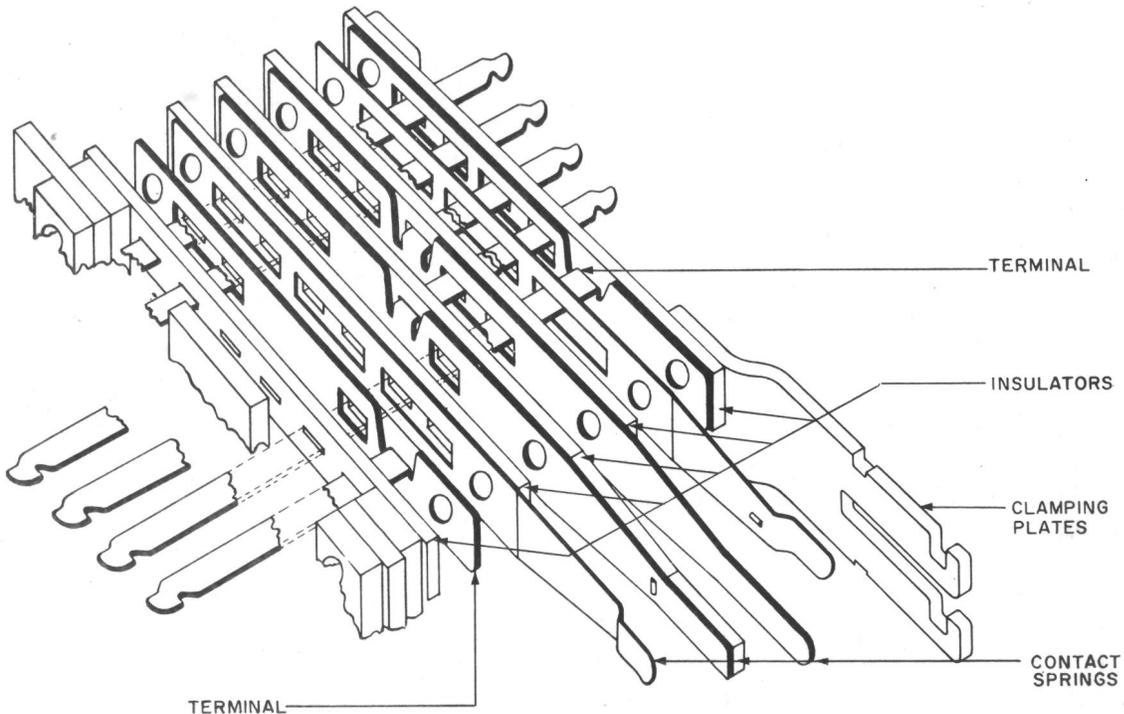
Partial Assembly of 444-Type Jack (viewed from bottom)
